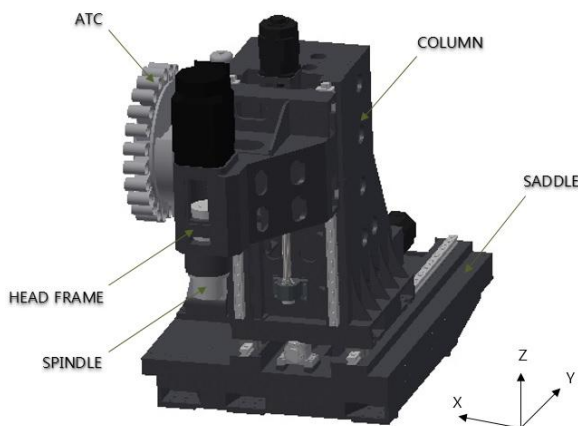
Preliminary Design Model of C-type Structure Machine Tools
